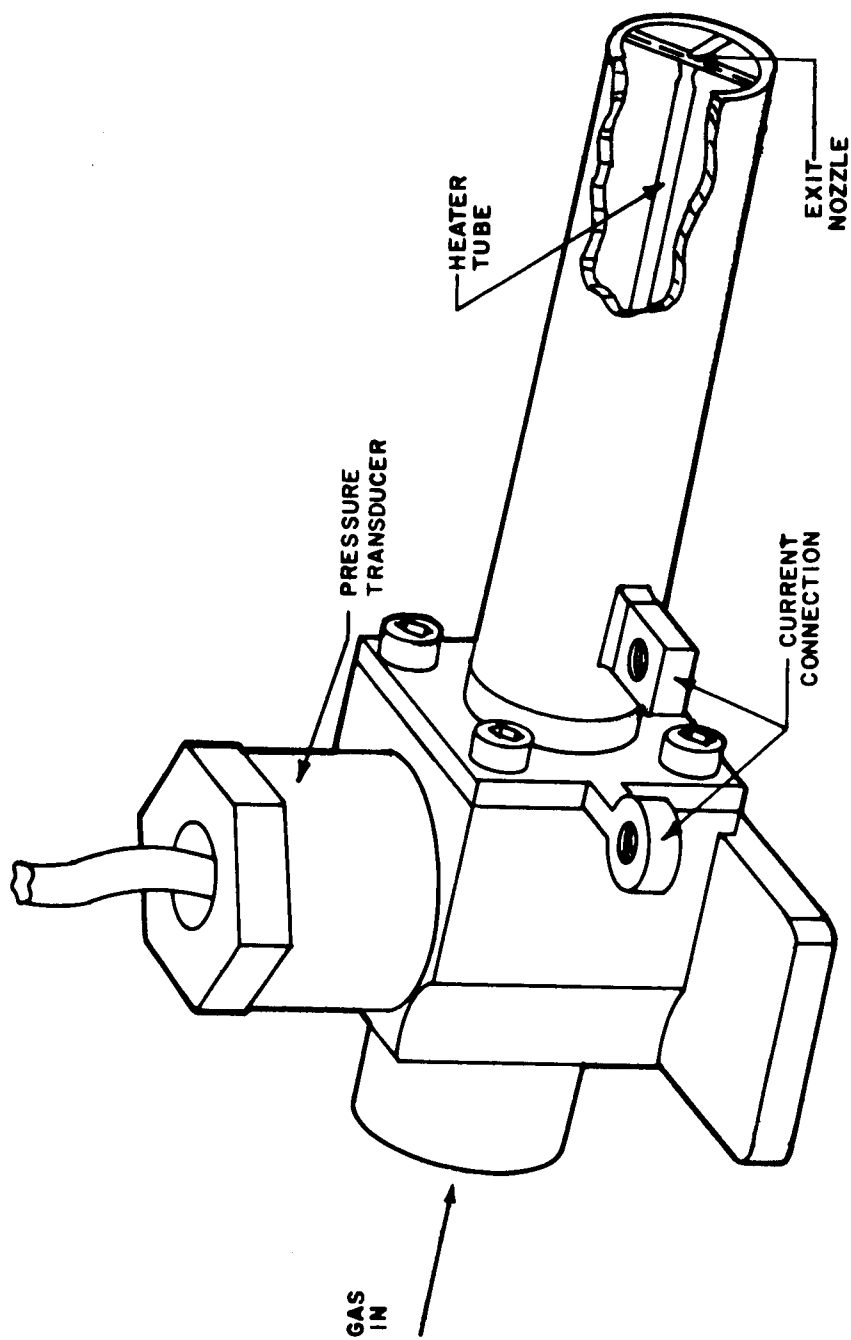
SCHEMATIC DIAGRAM OF THE FAST HEAT-UP THRUSTOR ASSEMBLY
